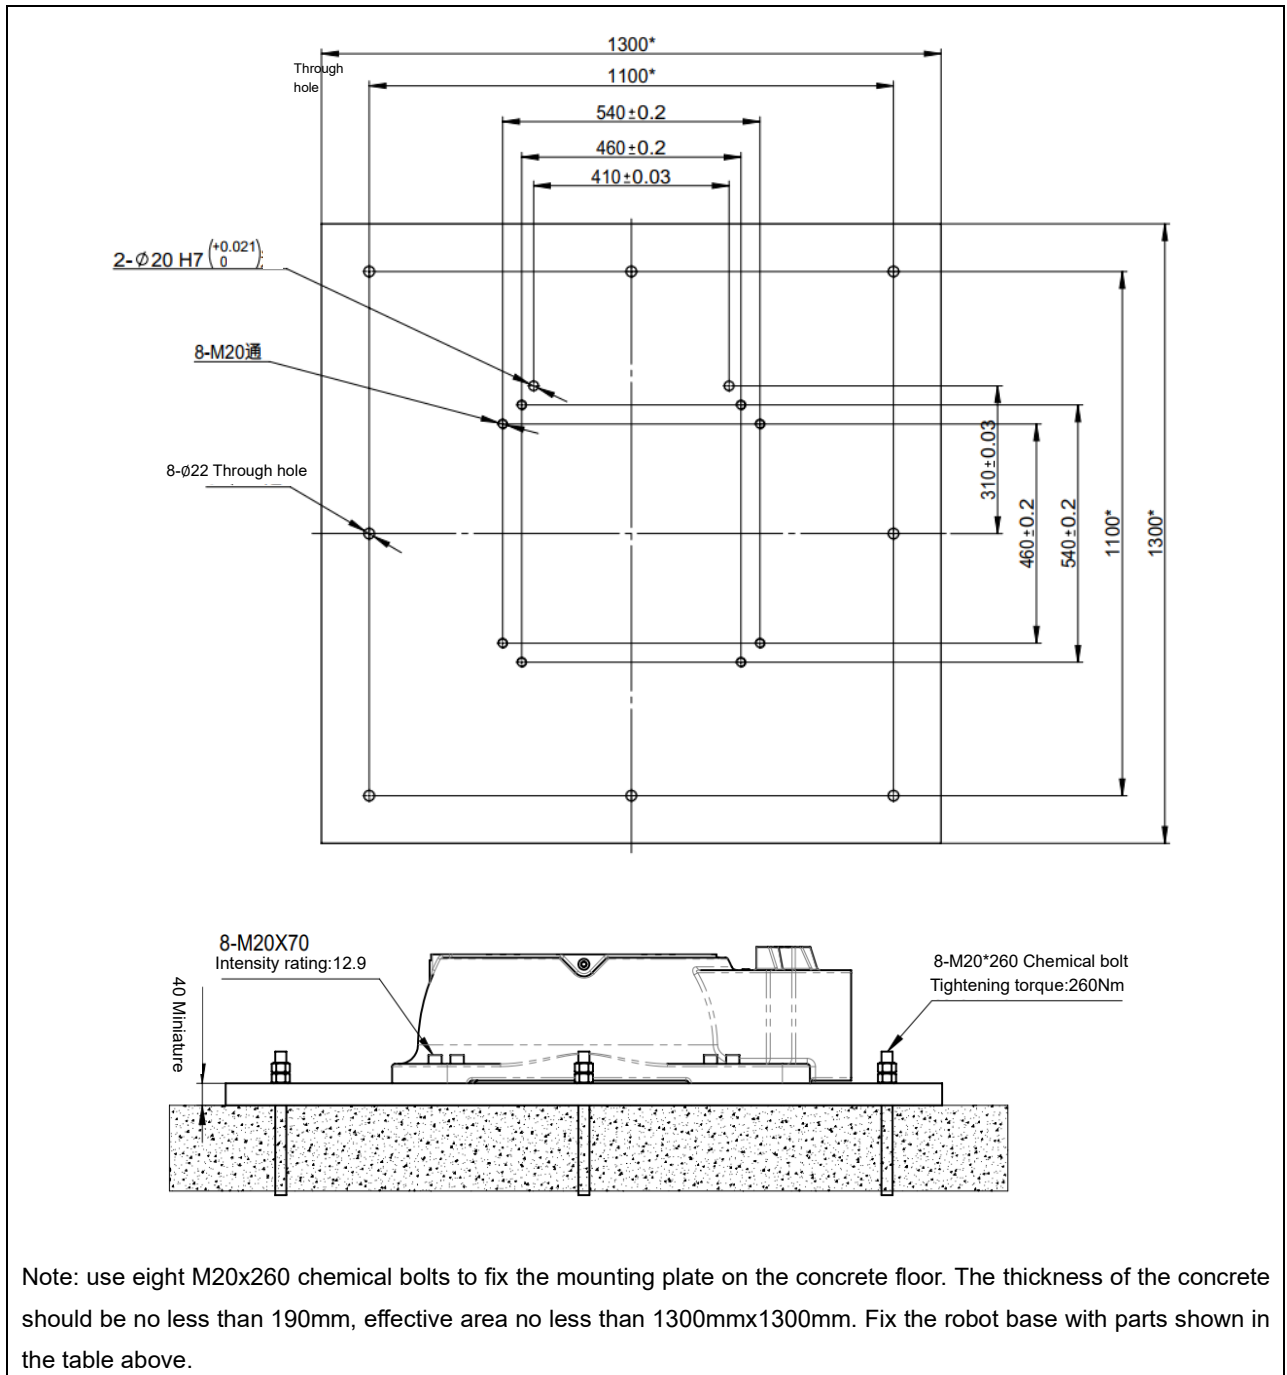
Robot mounting plate dimension and mounting method (ER270-2700)
